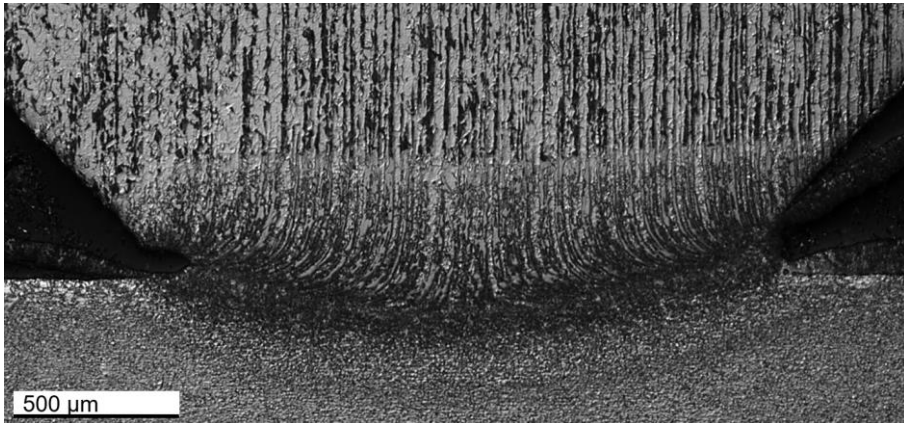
Missing of a joint without nugget lens in the joining zone during CD projection welding
